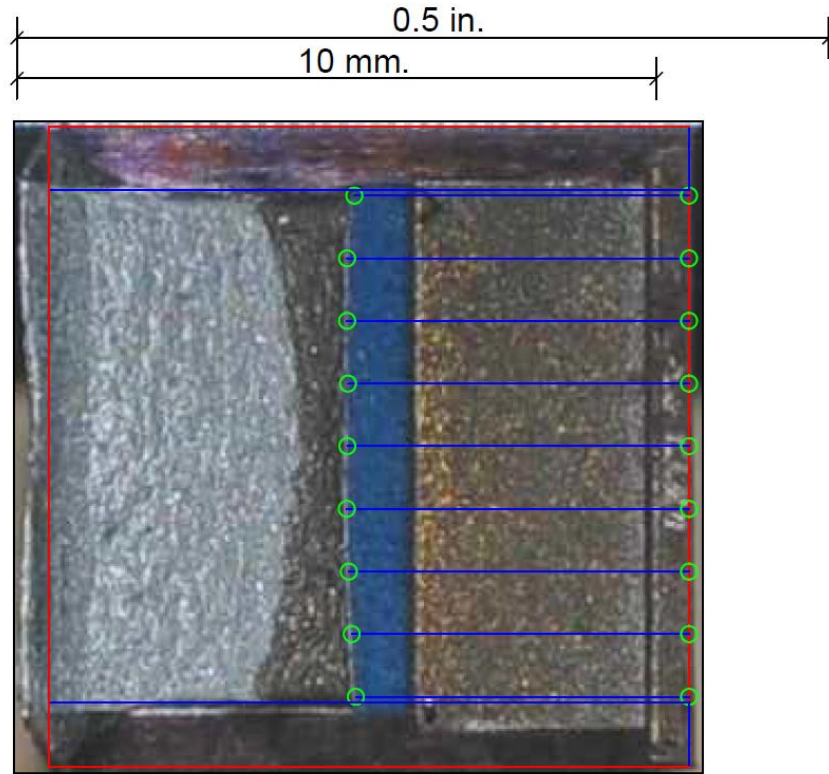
Specimen F16' Fracture Surface
